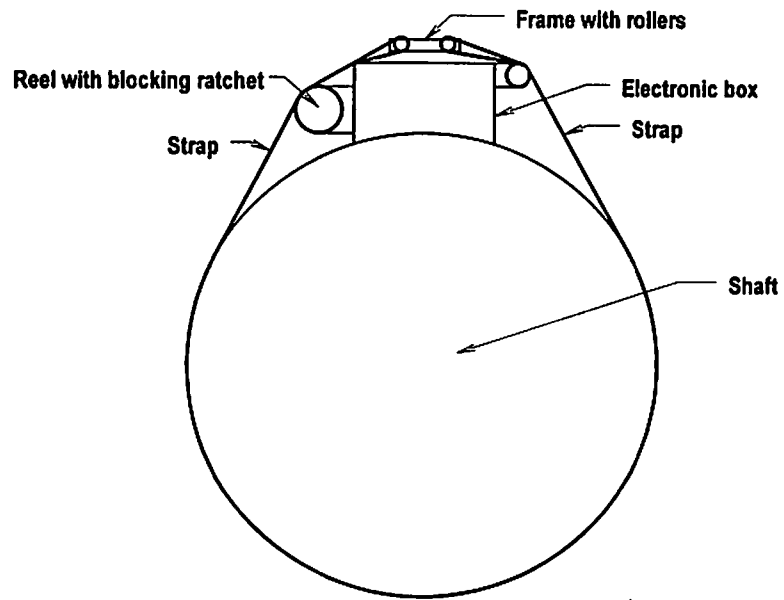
Principal drawing of the course of the strap for tightening of the electronic box at the shaft
